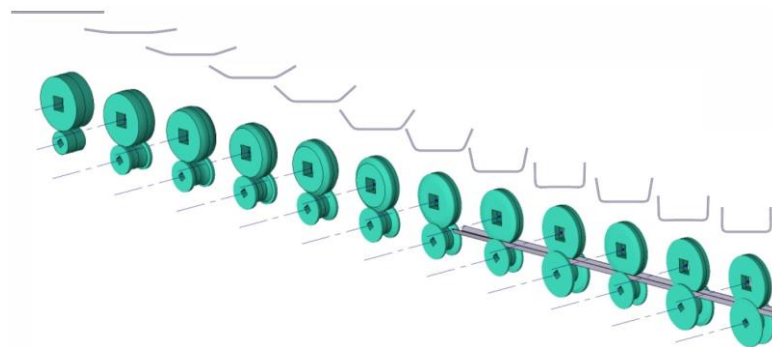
Roll forming scheme of the U-shaped profile with bending angles: 0°–8°–18°–30°–42°–54°–66°–78°–88°–80°–88°–90°.
